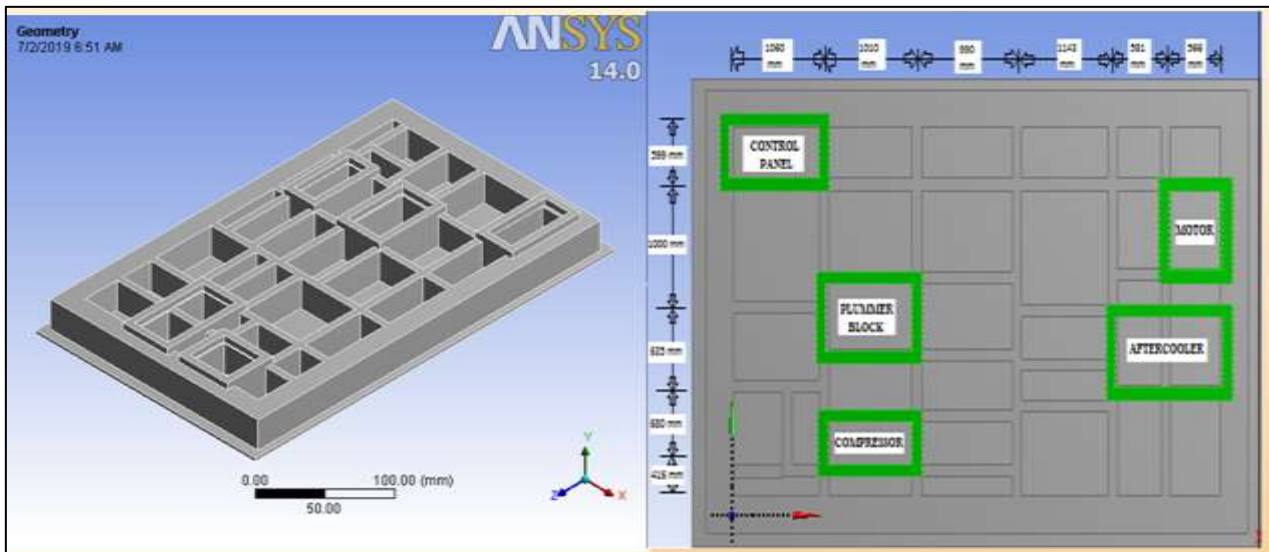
a) 3D geometry of compressor base frame, b) various components on compressor base frame.
